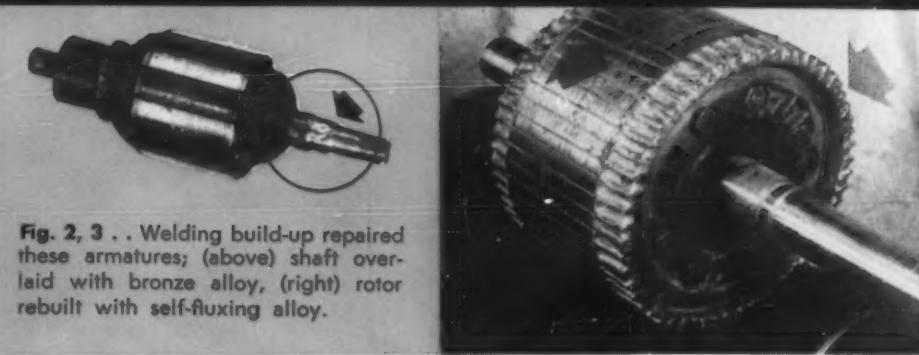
, 3 . . Welding build-up repaired these armatures; (above) shaft overlaid with bronze alloy, (right) rotor rebuilt with self-fluxing alloy.
